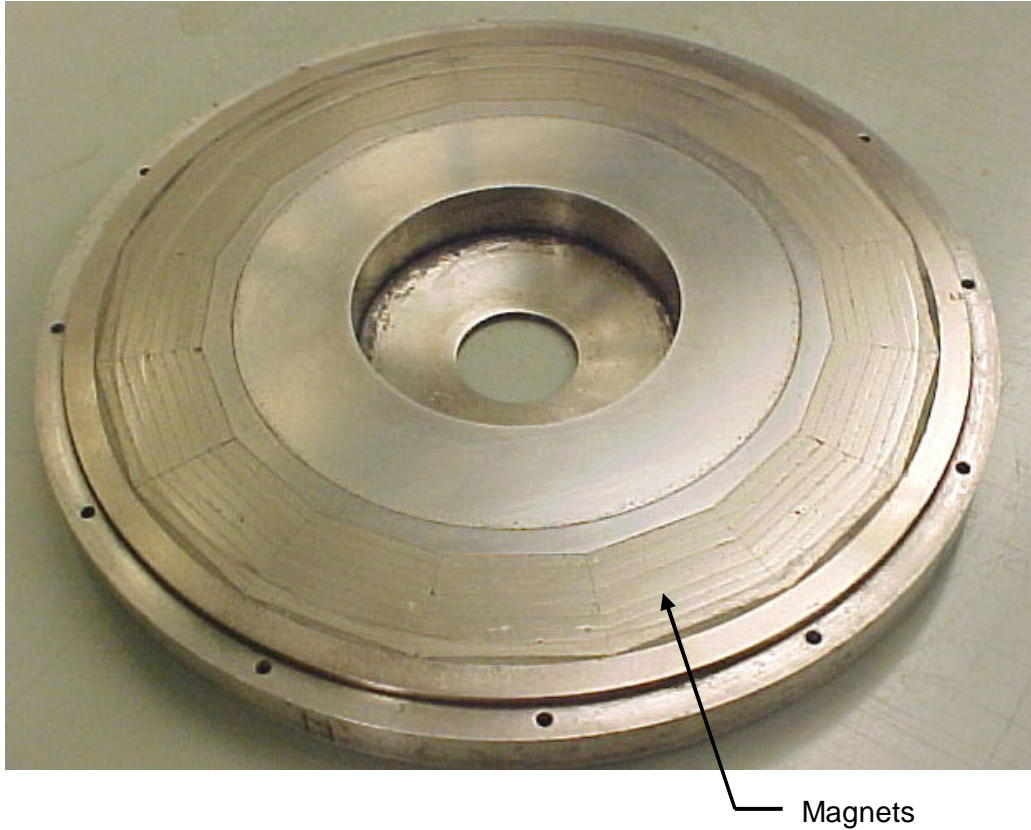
Photograph showing arrangement of magnets in the chamber base
